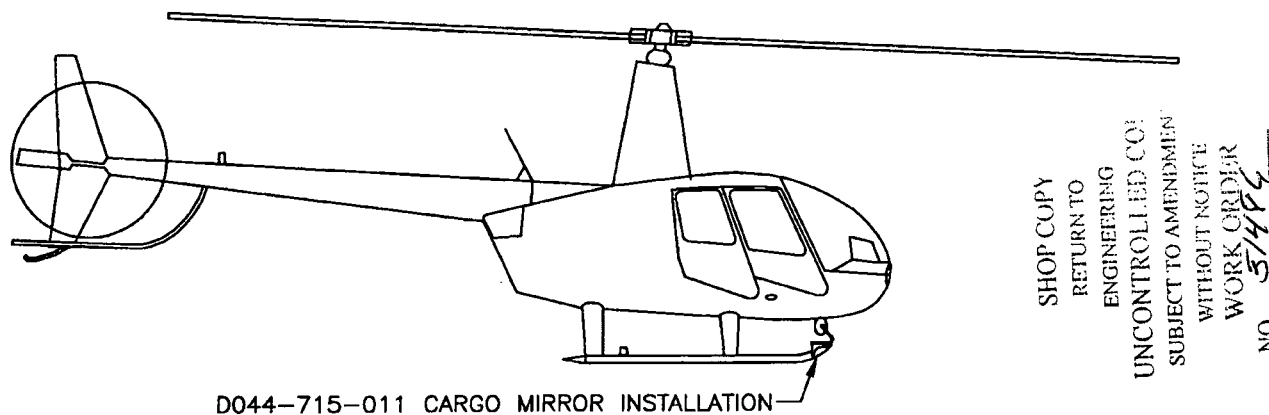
Location of R44 Cargo Mirror Installation (SIDE VIEW)
